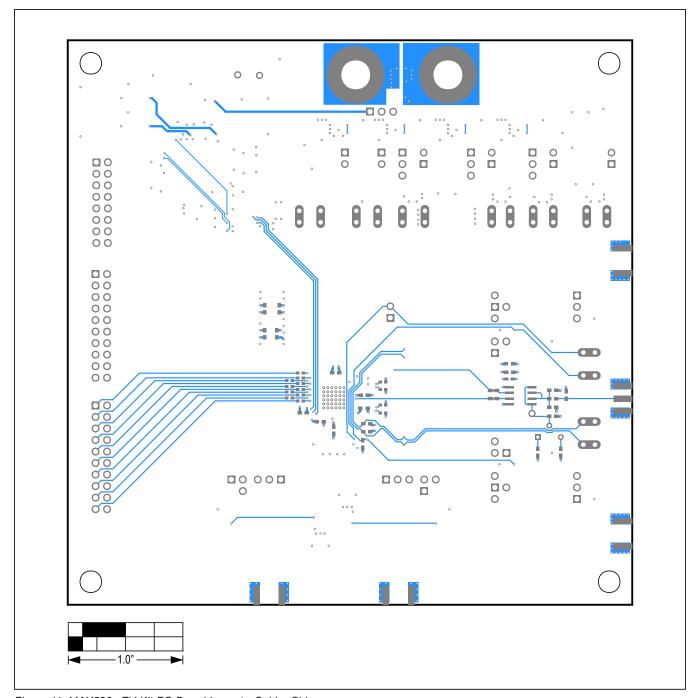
MAX586x EV Kit PC Board Layout—Solder Side
